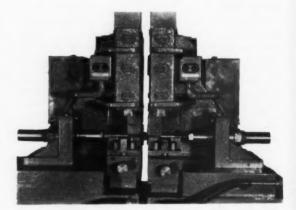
Welded drill blank still retained by clamps and showing end supports
